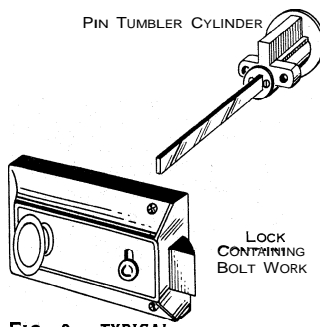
TYPICAL CYLINDER LOCK SEPARATED TO SHOW THE TWO MAJOR PARTS
